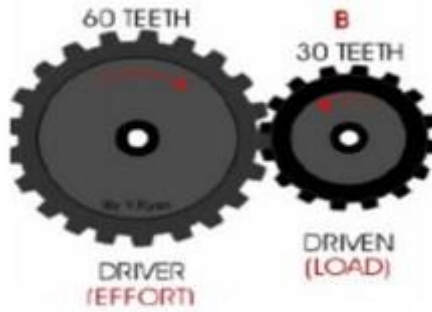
Gears (Gunawan *et al.*, 2013)
